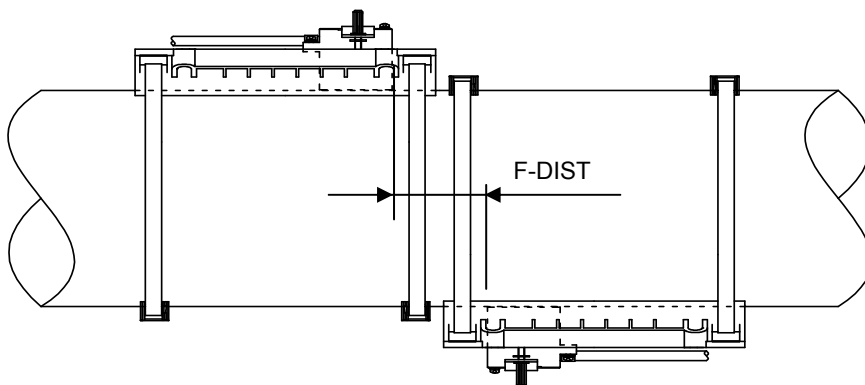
C: Mounting method for a pipe size of DN65mm or more and a mounting interval of 50 mm or more
